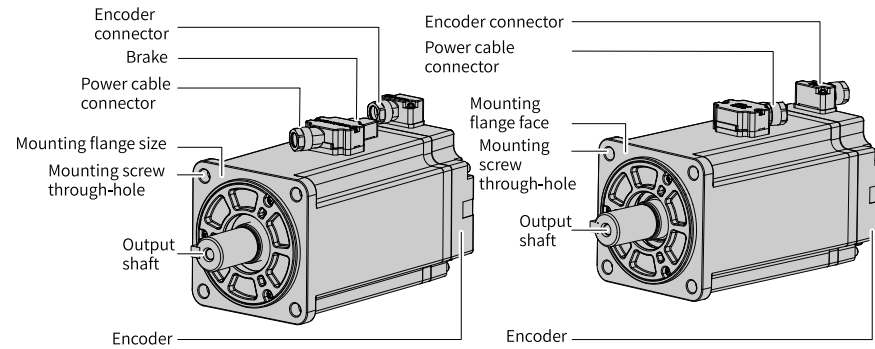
Components of a terminal-type servo motor (Left: motor with front cable outlet; Right: motor with rear cable outlet)
